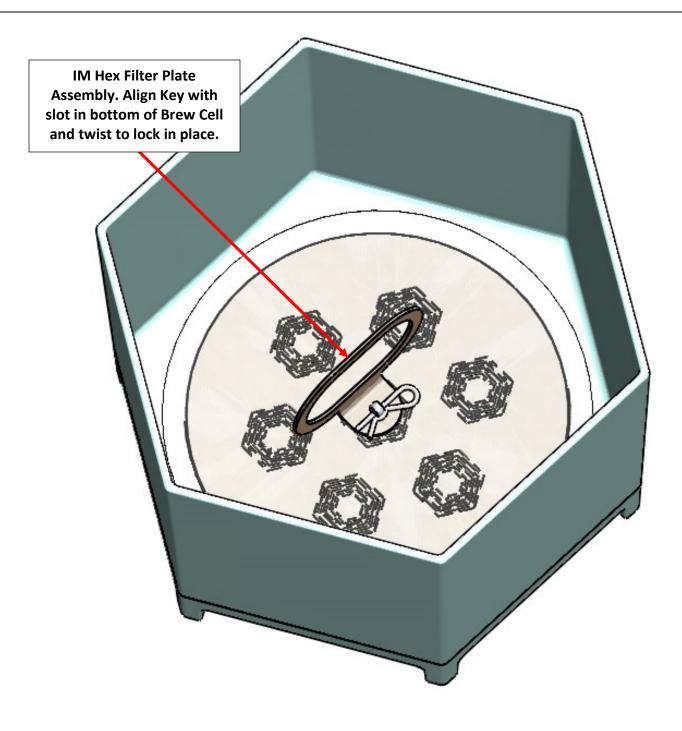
Hive Brew Cell and IM Hex Filter Assembly
